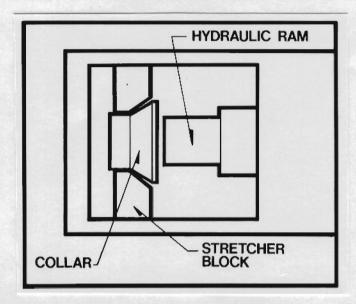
ENLARGING THE COLLAR NECK OPENING
